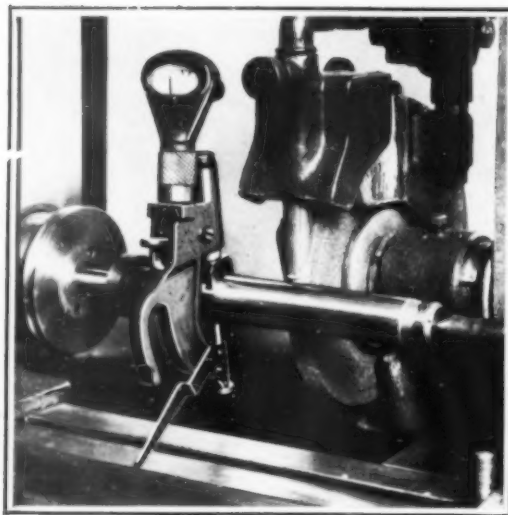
New-type Krupp "Mikrotast" gauge in which the gauge-blocks repose on the work (rotating or stationary). To enable it to be removed from the work, the operator presses the thumb-lever so raising the gauge-blocks.
